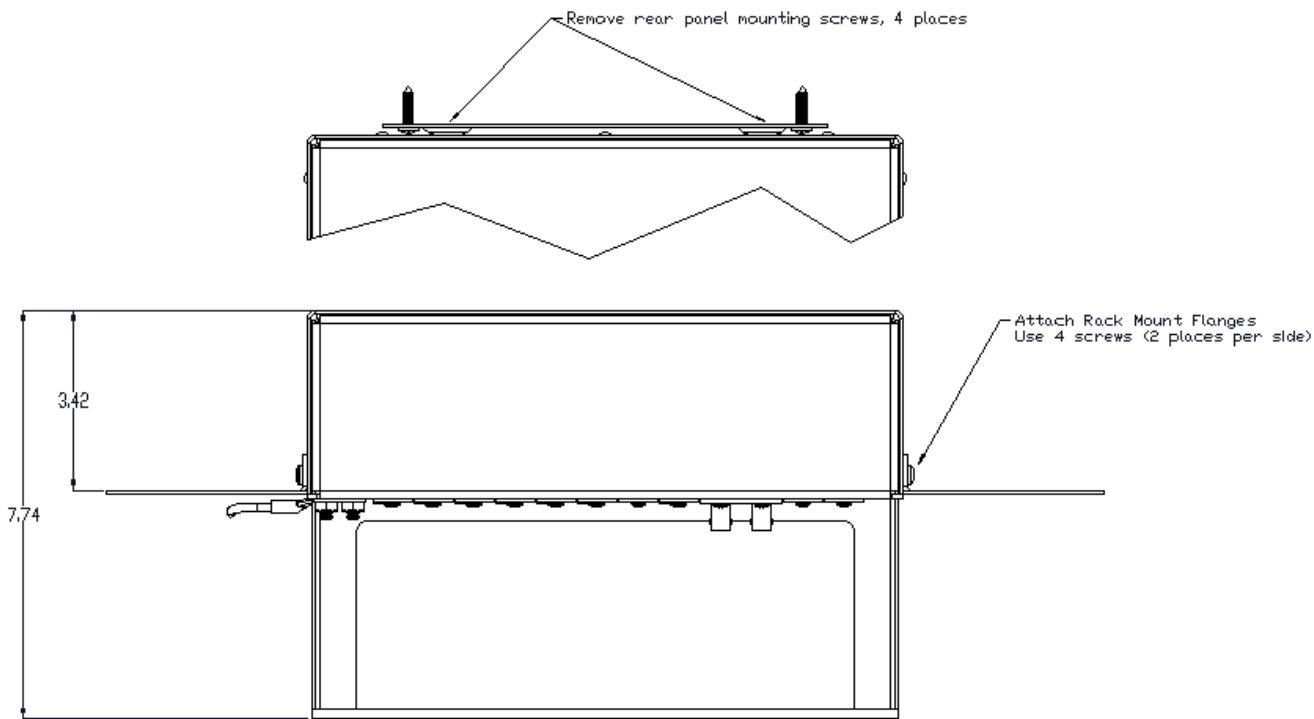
Optional 19" RS-310-C Adapter Mount Flanges (not provided with unit)
